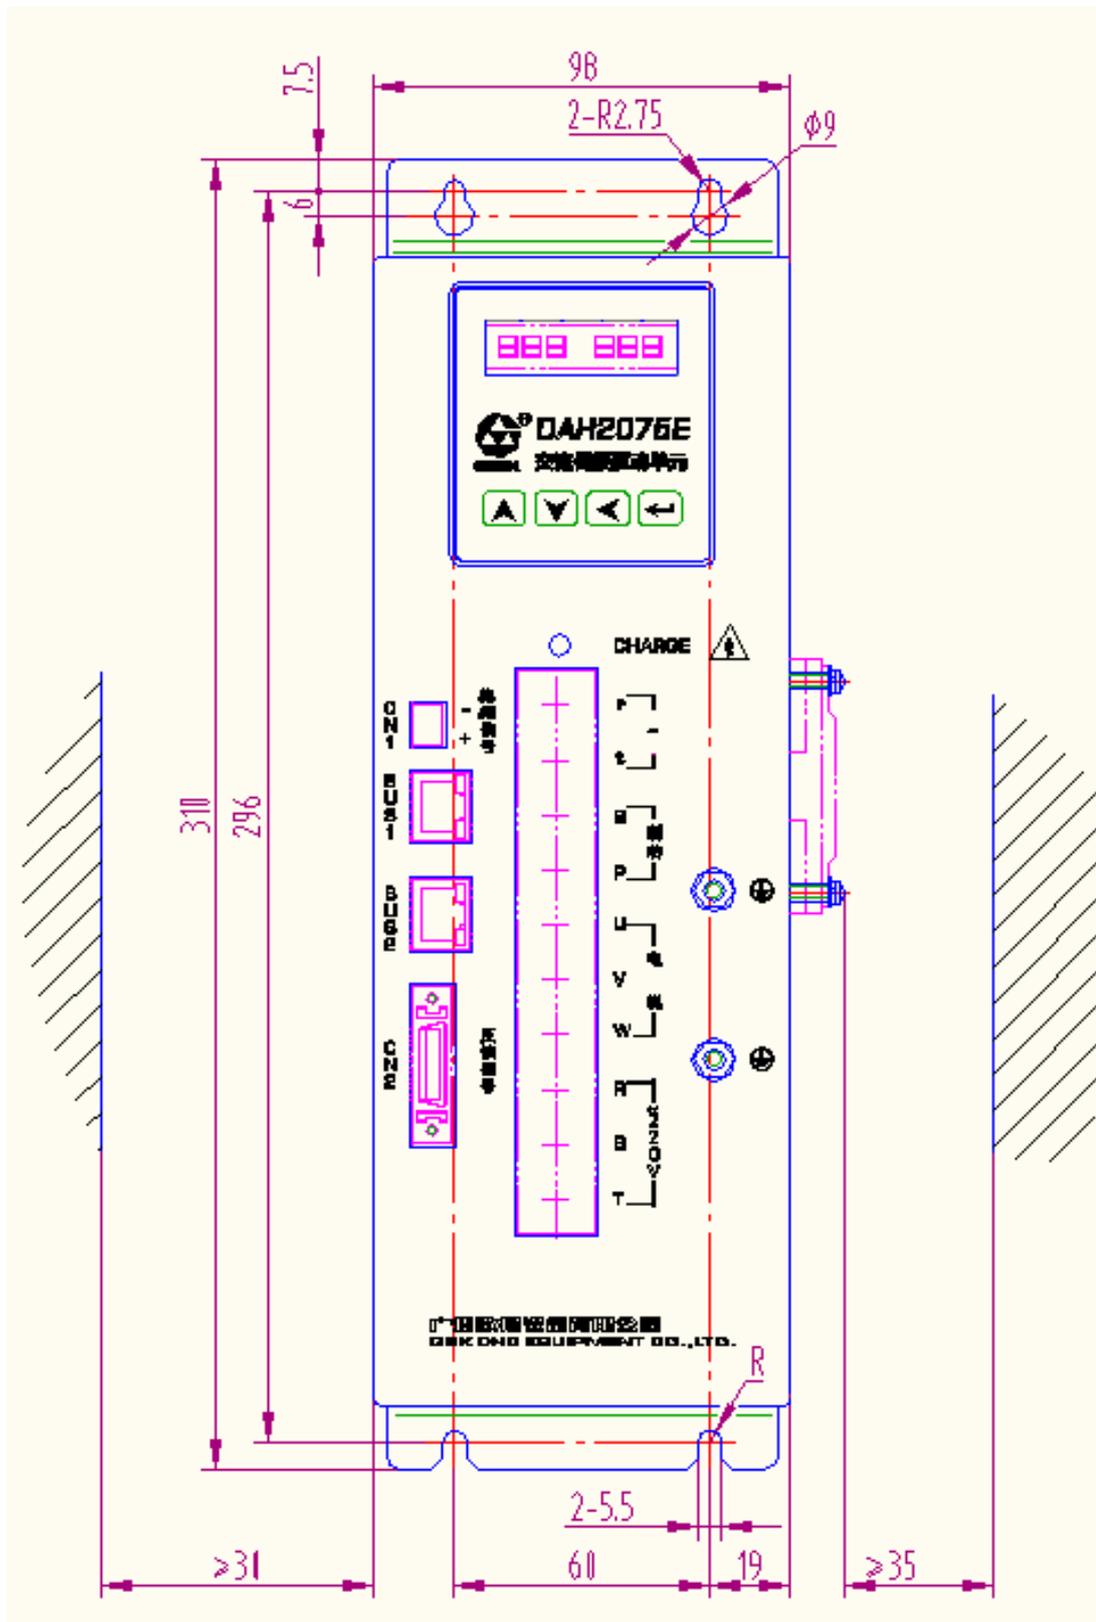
Installation Dimension for DAH 2075 Drive Unit
